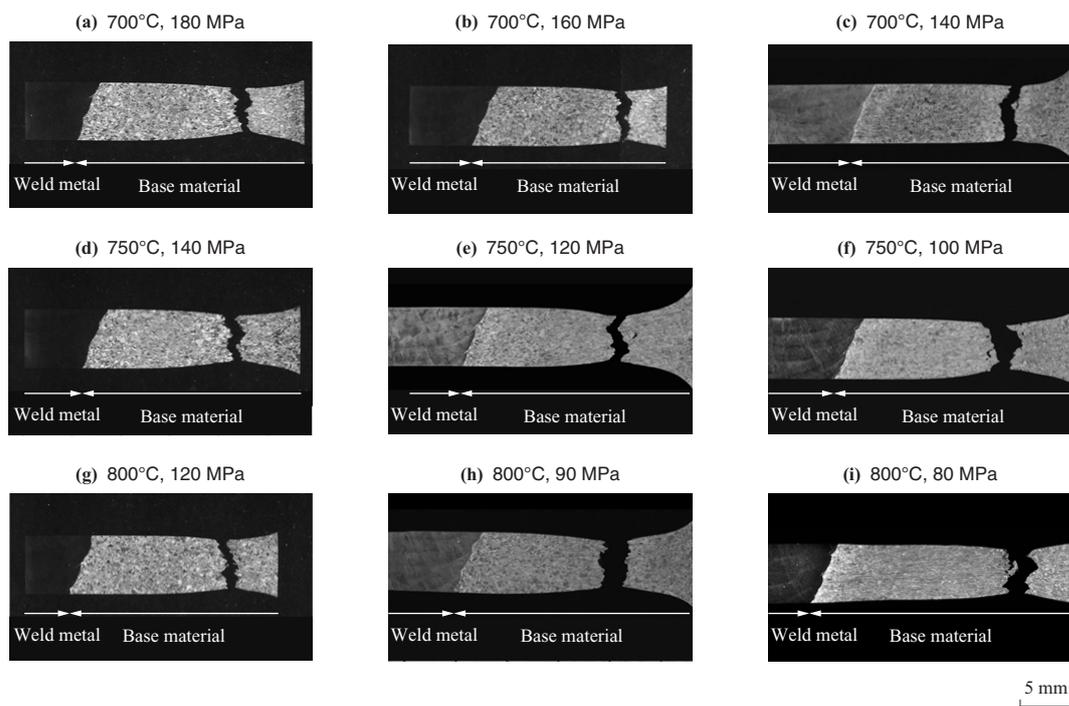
Cross-sections of the macrostructure of ruptured specimens in HR6W welds
